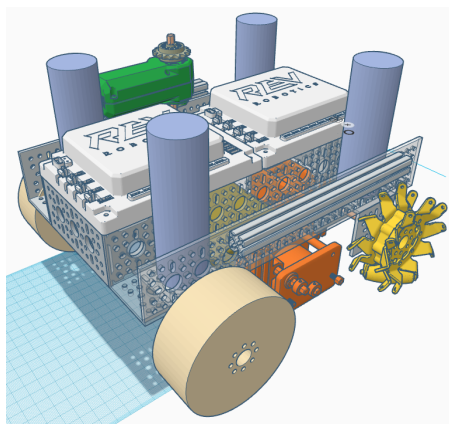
Figure H: Smaller 16" diagonal chassis with vertically mounted motors
